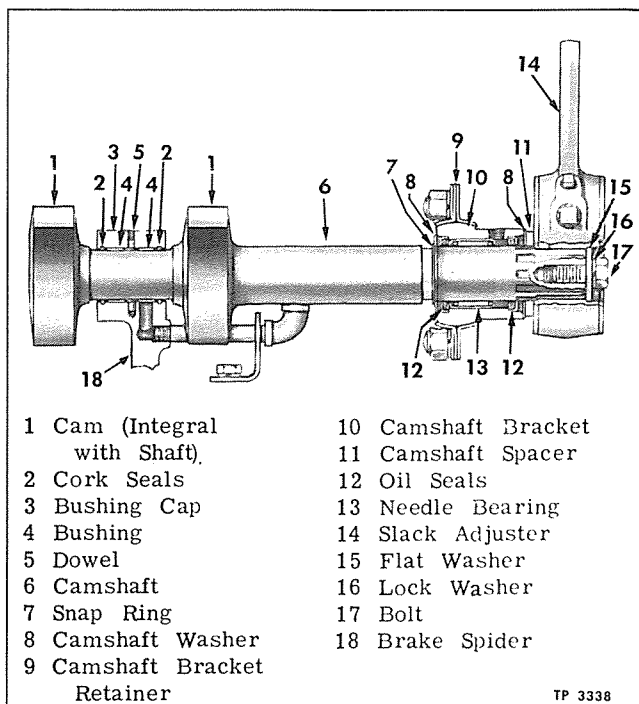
Rear Camshaft and Slack Adjuster Mounting (Late Vehicles)
